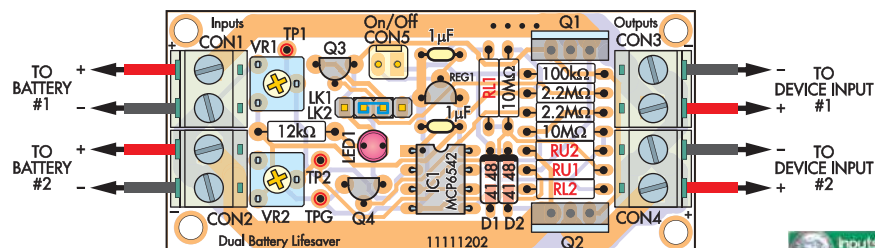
the PCB has been kept as small as possible while still being easy to build, handling a decent amount of current and providing for easy wire attachment and mounting. Assembly is straightforward but make sure that the IC, terminal blocks, MOSFETs, diodes and LED are correctly orientated. Use the component overlay above in conjunction with the same-size photo at right to assist you in component placement. Note that the values of RL1, RL2, RU1 and RU2 need to be chosen from the table overleaf.
